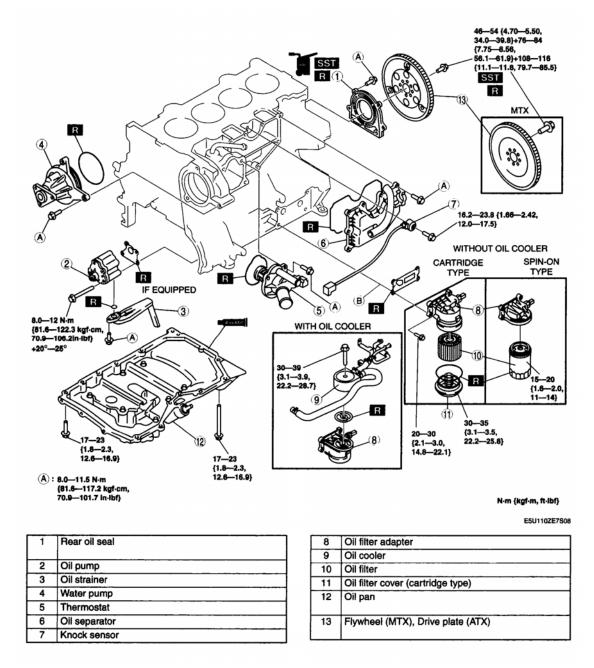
Exploded View Of Cylinder Block (II) Assembly & Torque Specification Courtesy of MAZDA MOTORS CORP.
